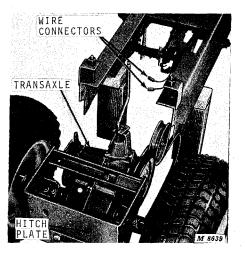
Hitch Plate and Transaxle Assembly Removed from Tractor
